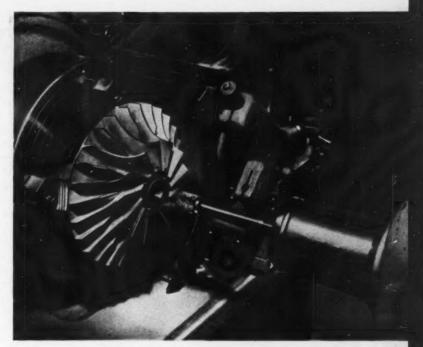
The blades of the impeller are made by radially gashing a solid aluminum forging on a riseand-fall milling machine. Angle fixture produces proper blade pitch.
